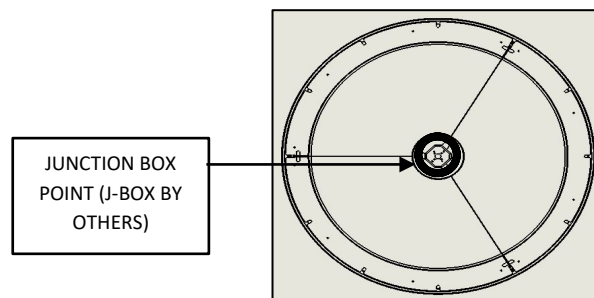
TOP VIEW SHOWING MOUNTING VIEW INFORMATION
